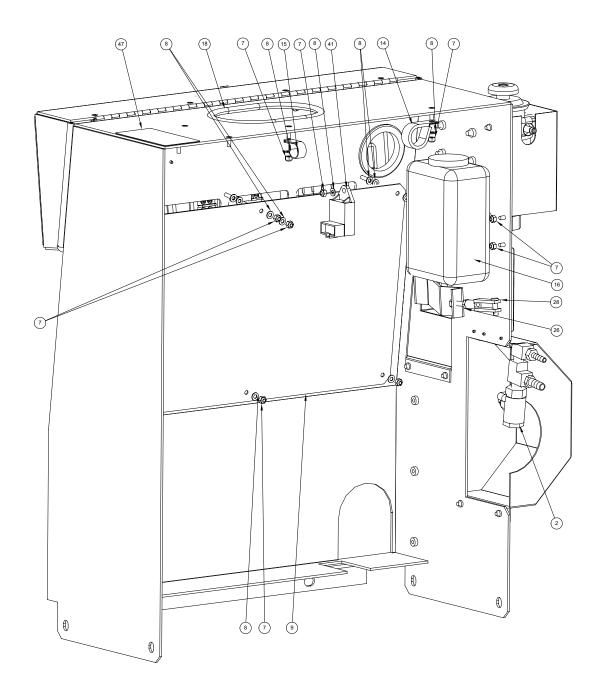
Dash Assembly CTS 450 Diesel - Front View D-5867 Rev C
